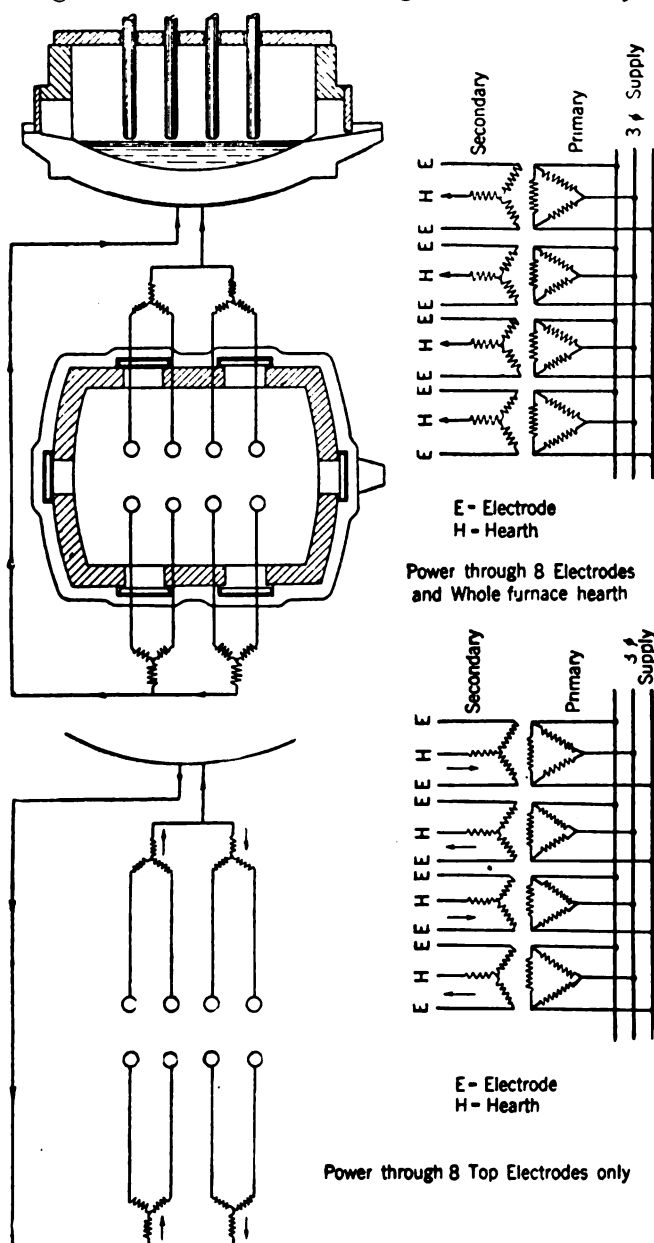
Sixty-ton Greaves Etnell furnace at the Ford plant in Detroit.
